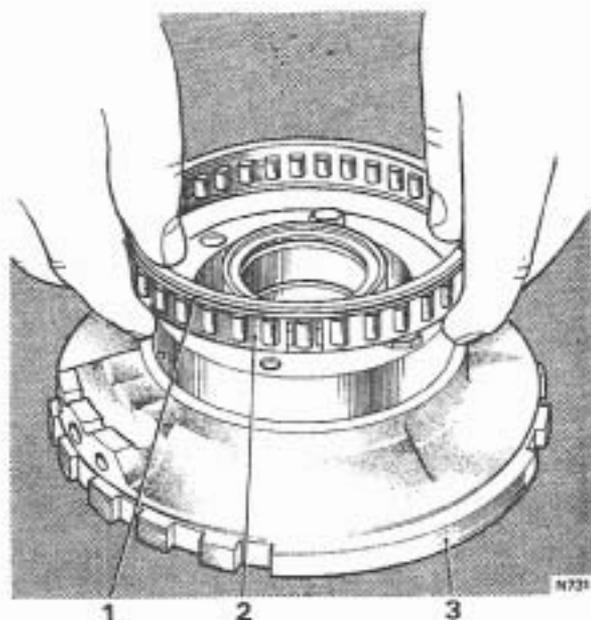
FITTING THE REAR SPRAG TO THE CENTRE SUPPORT (SPRAG CLUTCH)
